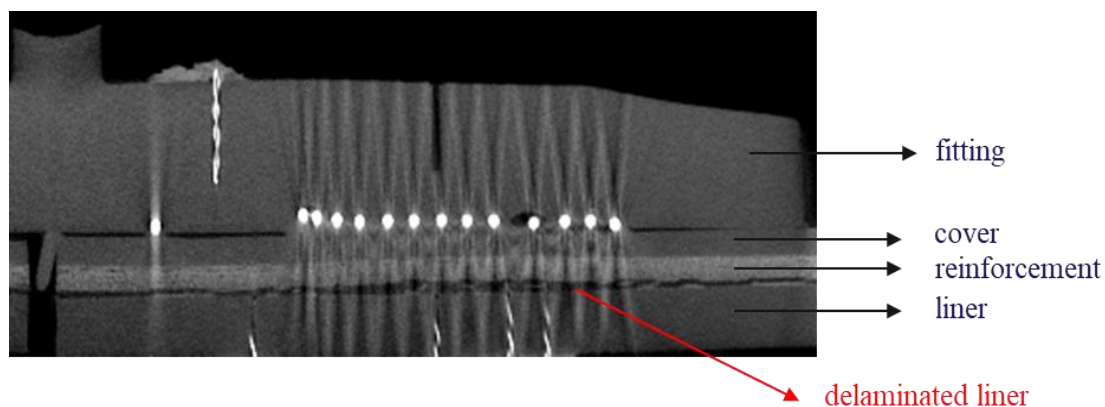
CT Scan of EF welding and falling thermocouples
